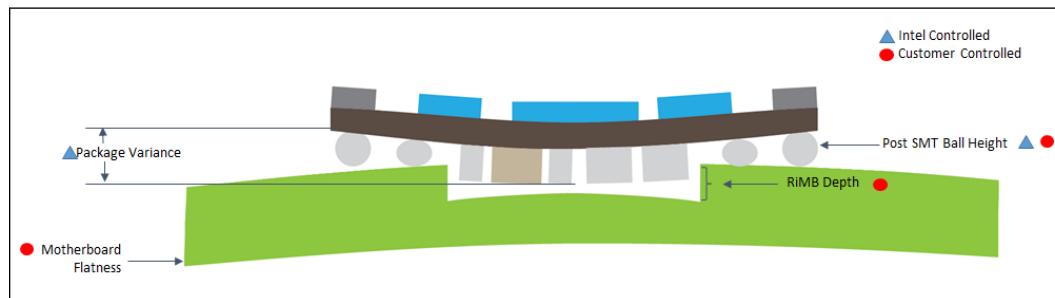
Tiger Lake UP4 Recess Dimensions
